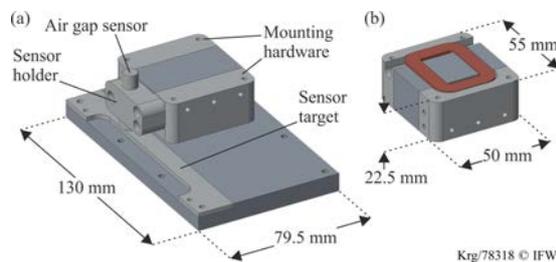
(a) Final electromagnet assembly; (b) Bottom view of the core unit
